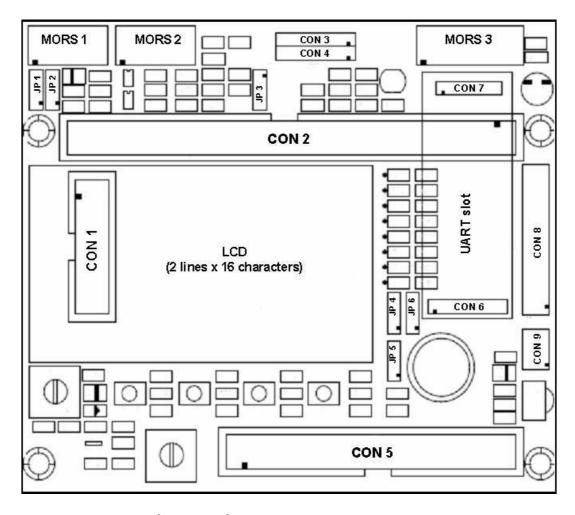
[FLEX109] Details of FLEX Demo Daughter Board
